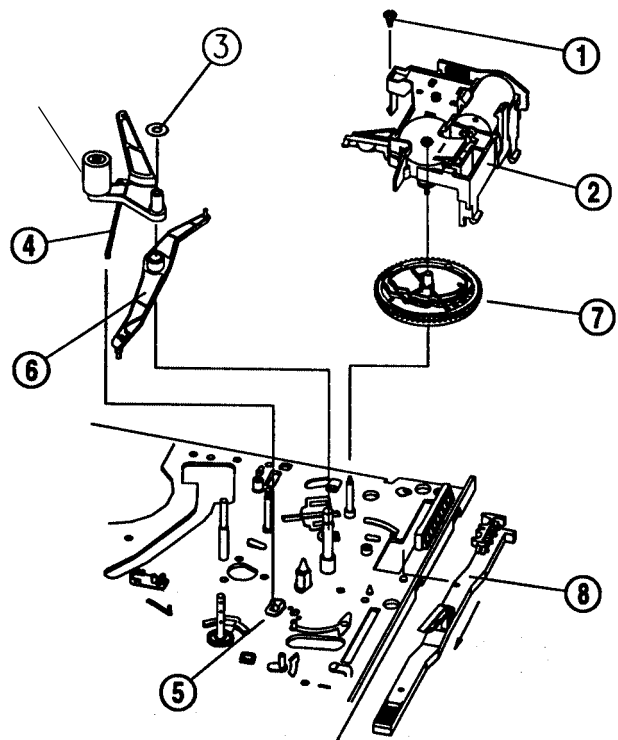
Replacement of L/C Bracket Total Assembly/Pinch Lever Total Assembly/cam Gear/Relay Lever/F/L Rack
